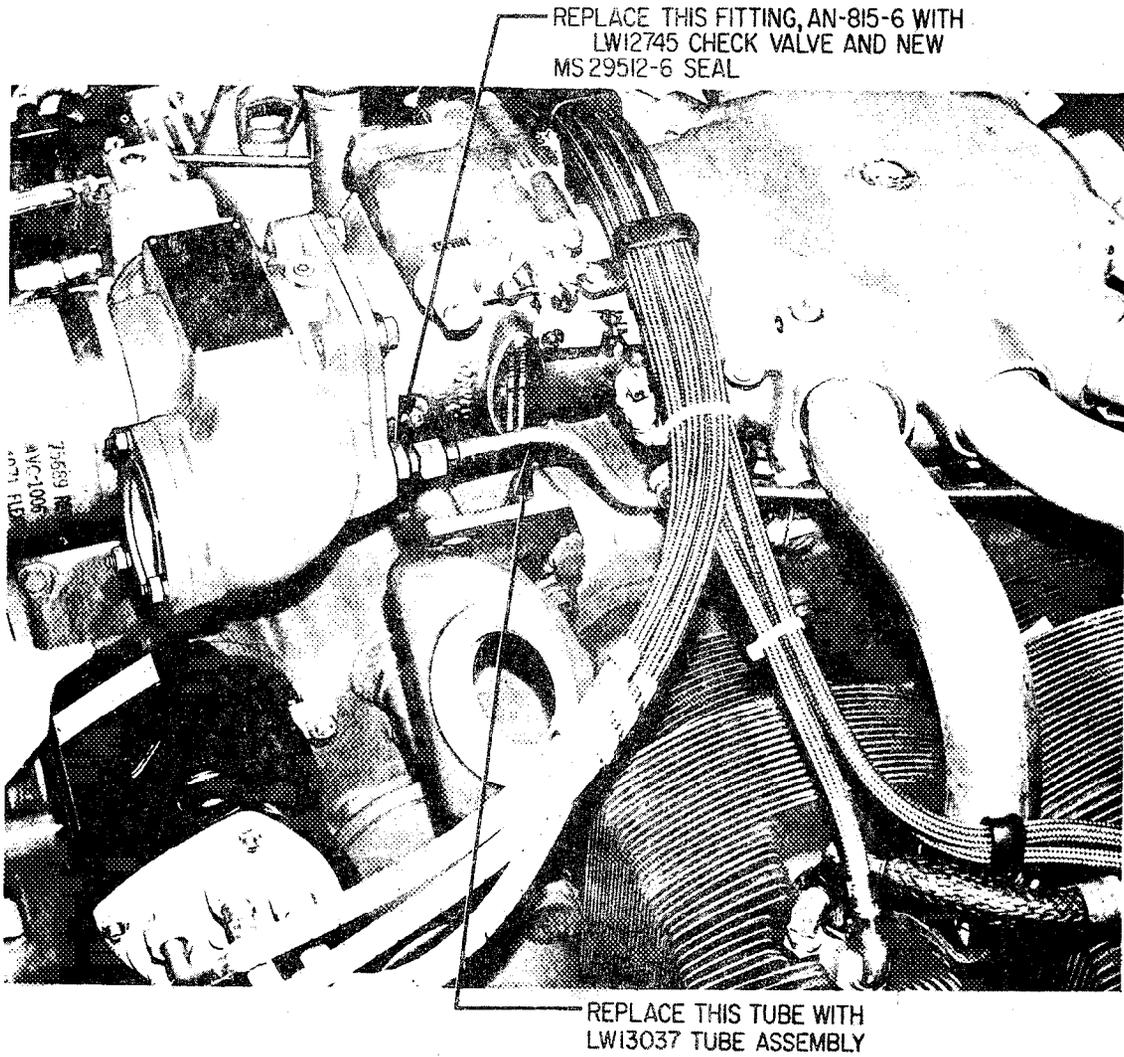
Top View of Engine Showing Location of Fuel Drain Tube
